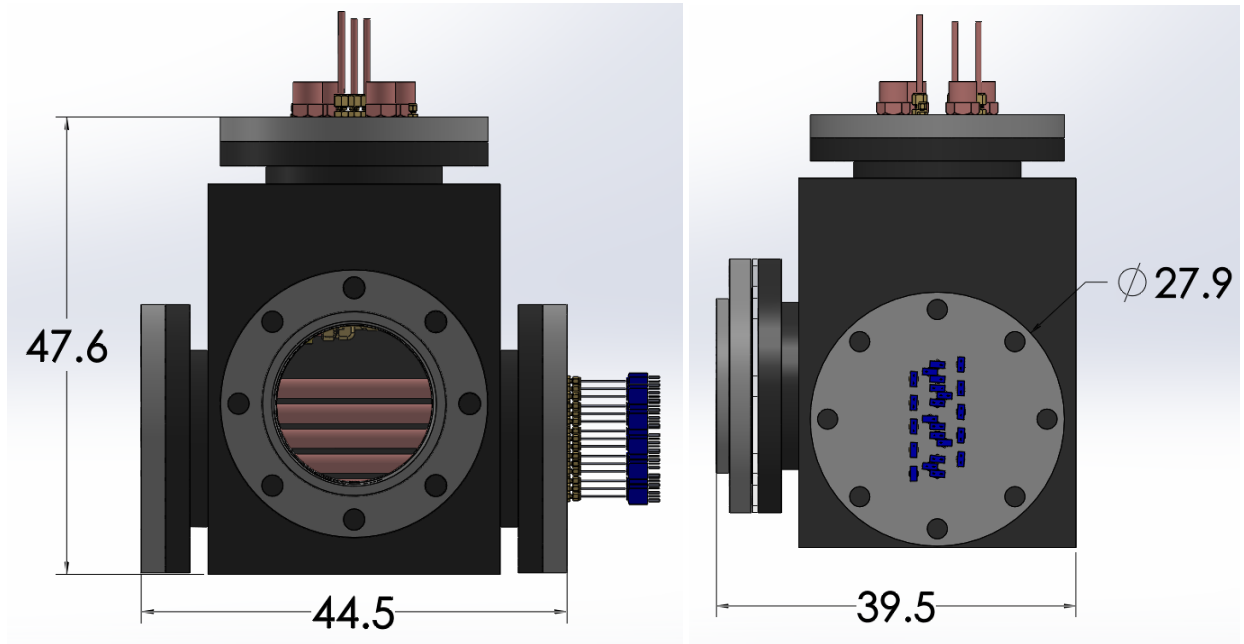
Front elevation (left) and right side elevation (right) 3D renderings of the test section
